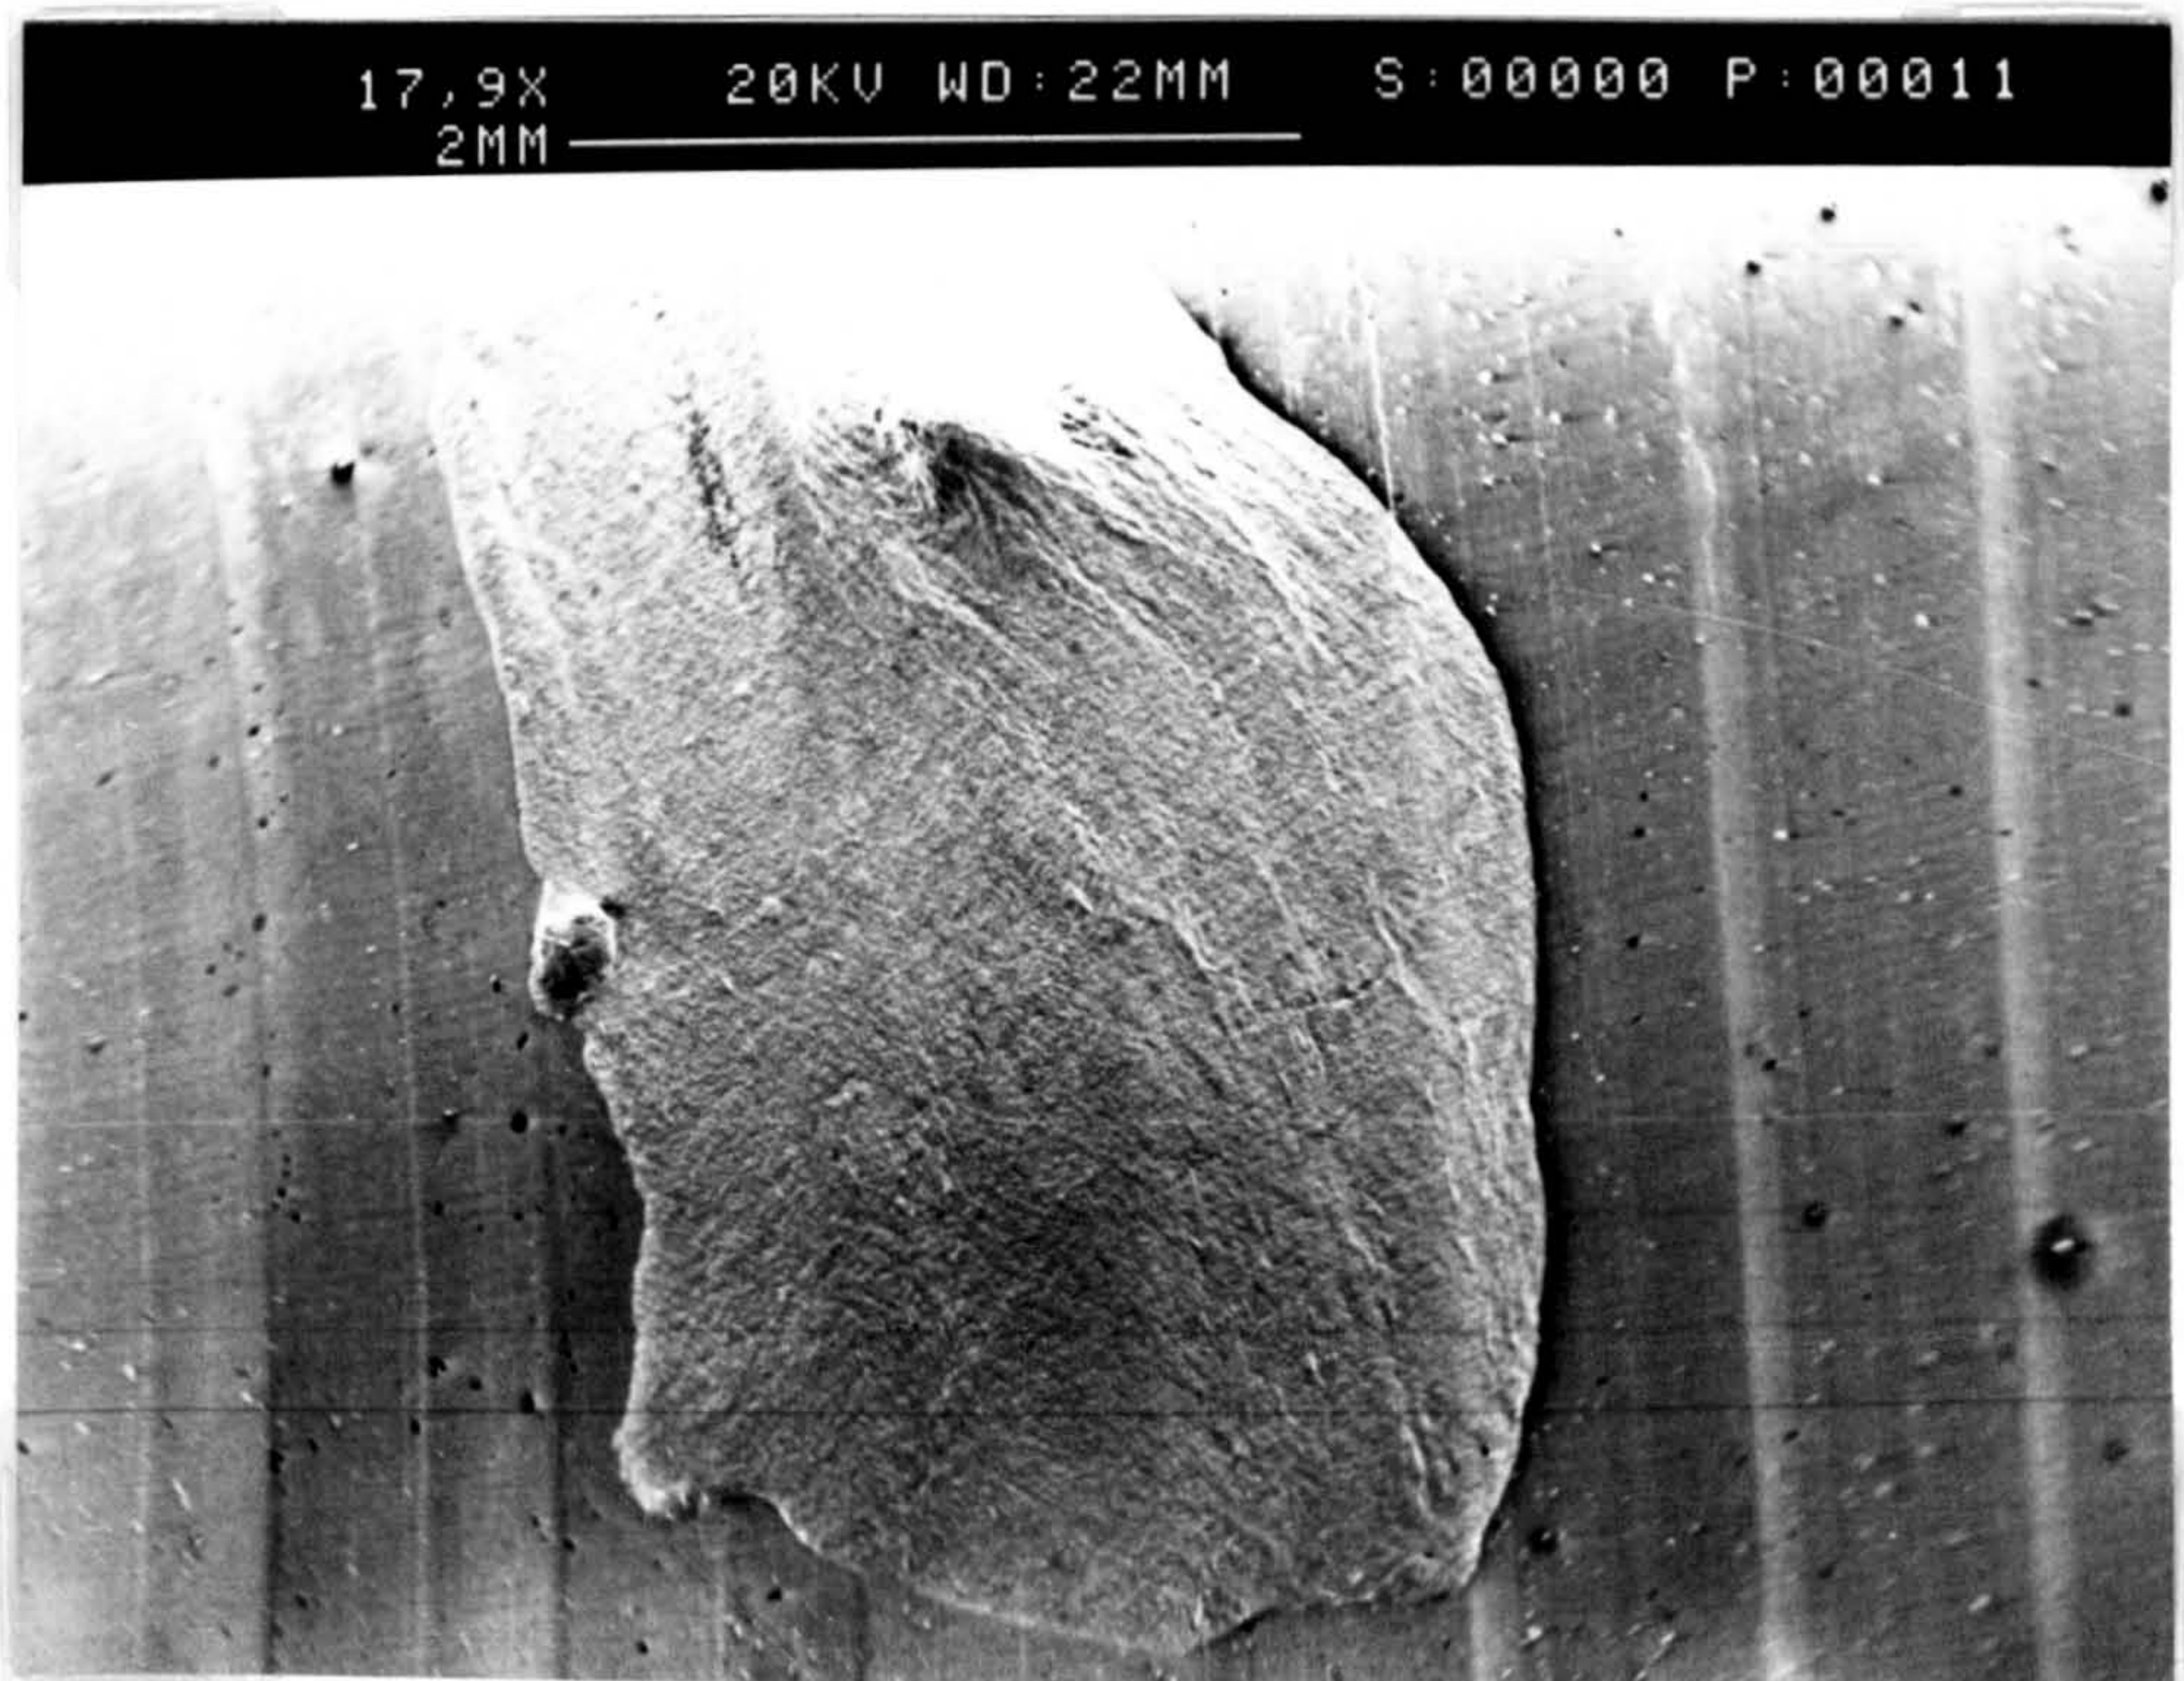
12.5 μm end mill sample with BUE defect, surface photograph
